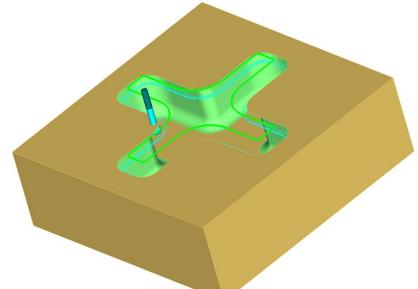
Initial Horizontal Z Contours tool path colliding with the part
